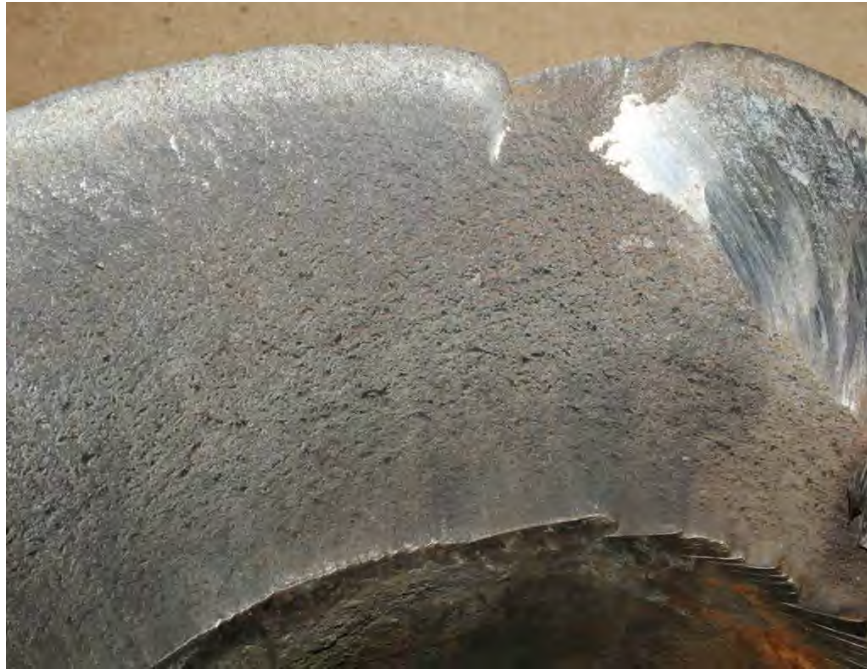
Close-up photograph of fracture surface of generator shaft forward end fracture half.
